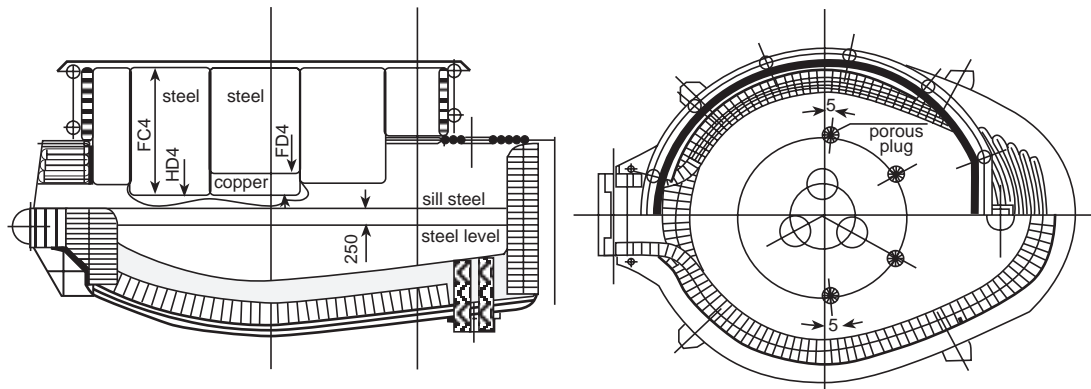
Plan and section views of a modern EBT EAF. (Courtesy of Danieli.)
